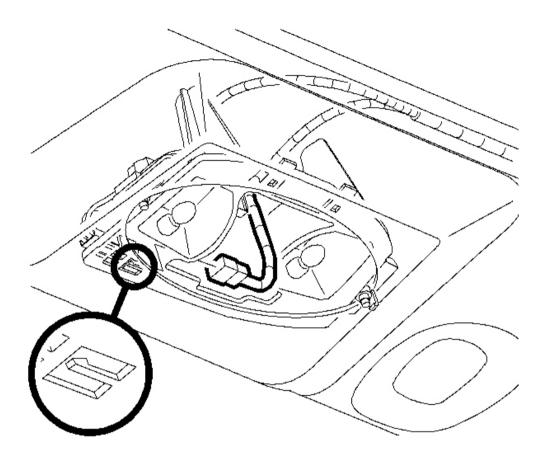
Disconnecting/Connecting Electrical Connector To The Reading Lamp Courtesy of GENERAL MOTORS CORP.
